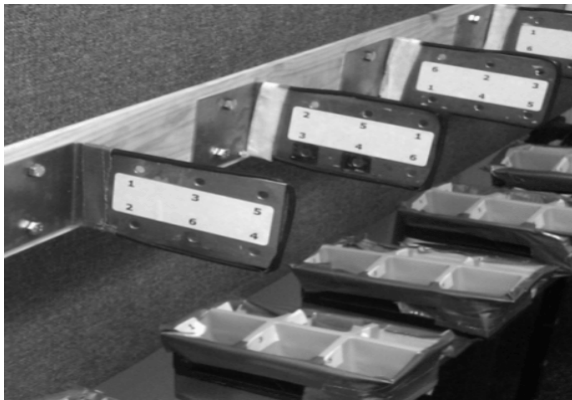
(a). CODE MATCHING ASSEMBLY TASK IN VARIABLE ORDER
